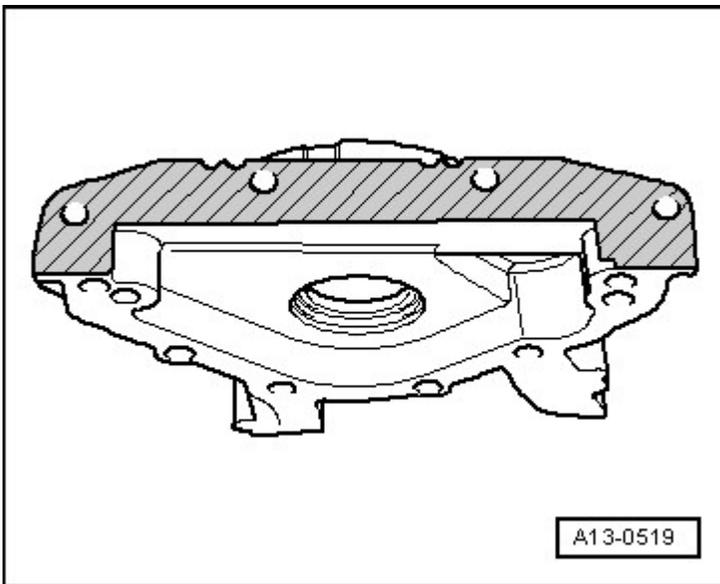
Lightly Coating Lower Sealing Surface Of Sealing Flange With Sealant
